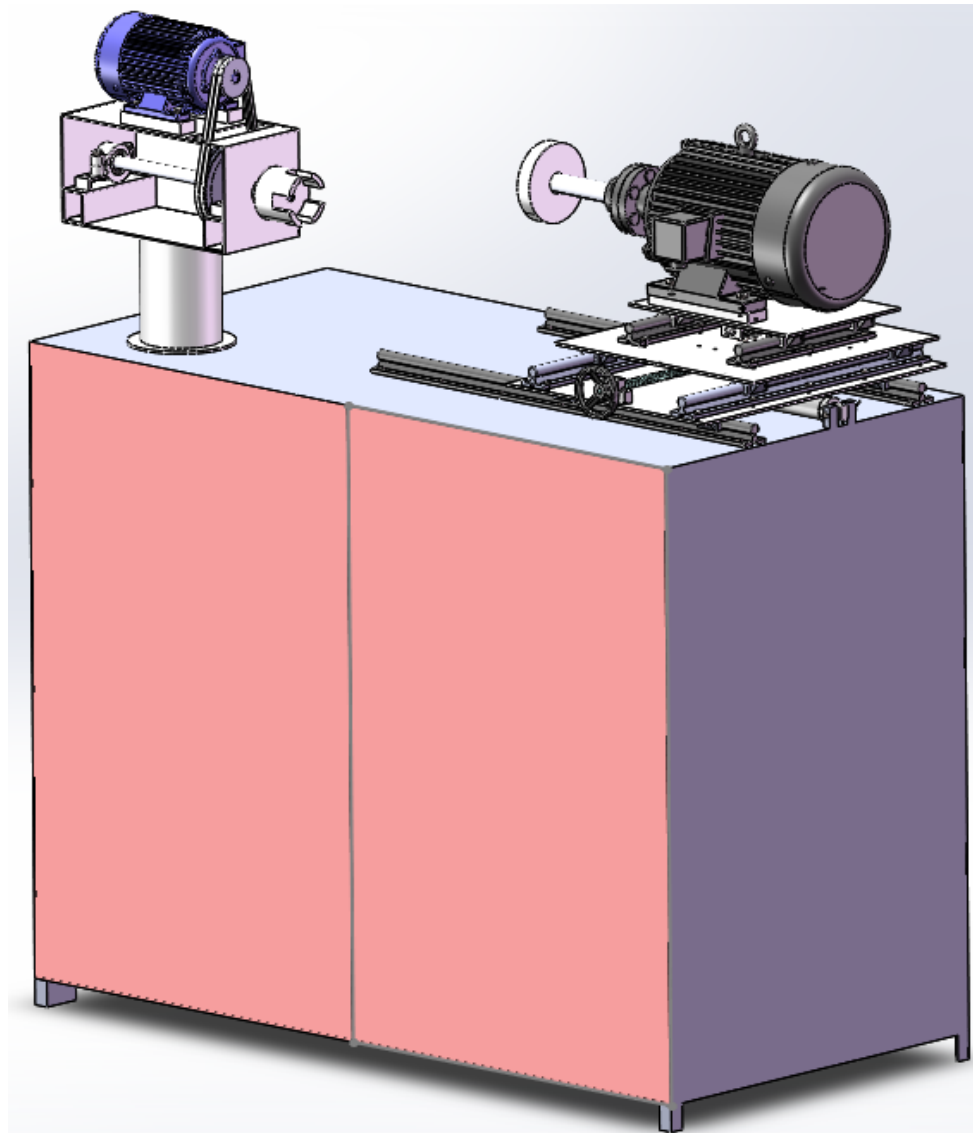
Semi-automatic stainless-steel pan polishing machine
